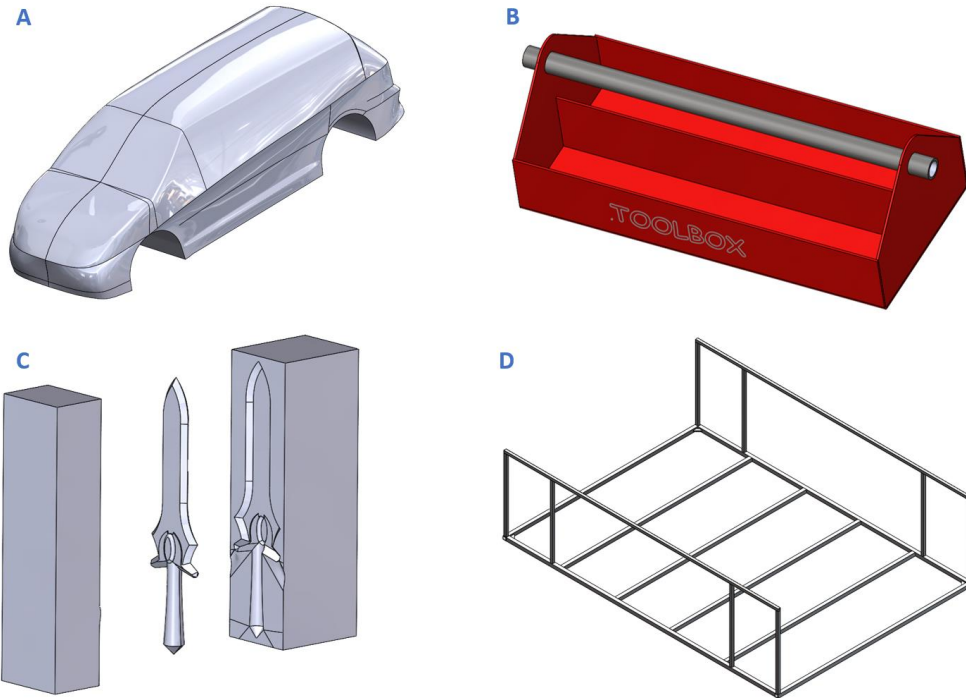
Example student models include a mini-van (A – surfaces), a tool box (B – sheet metal forming), a sword (C – mold design), and a bike trailer frame (D – weldments).
